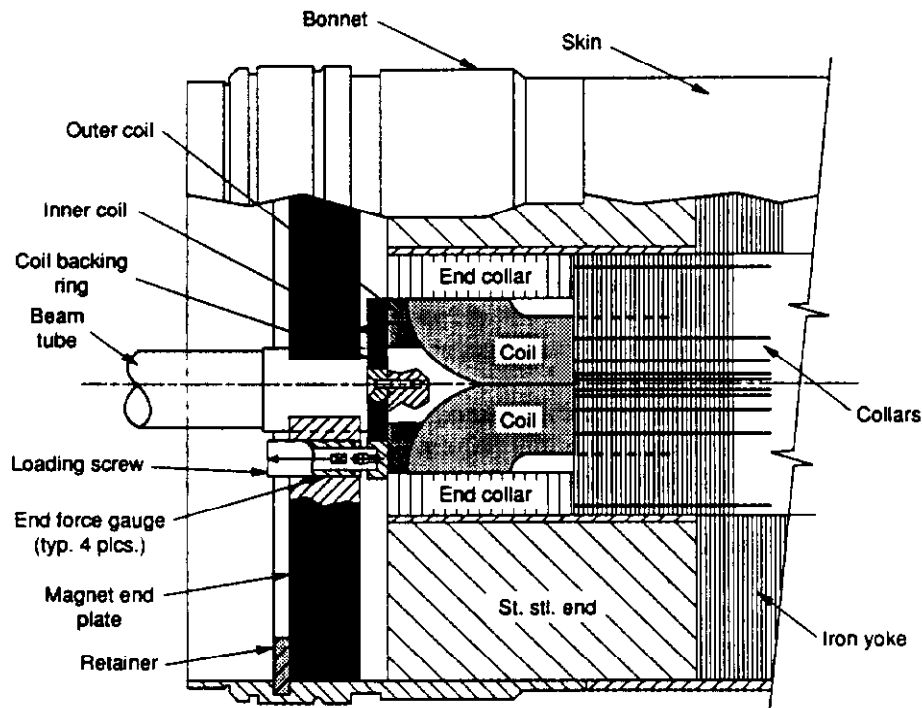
Cutaway view of the non-lead end part of BNL 4-cm-aperture, 17-m-long collider dipole prototype.
